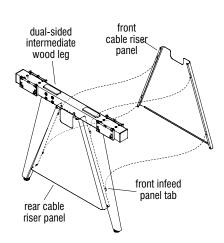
Dual-Sided Benching - Wood Adder Leg with Cable Riser
